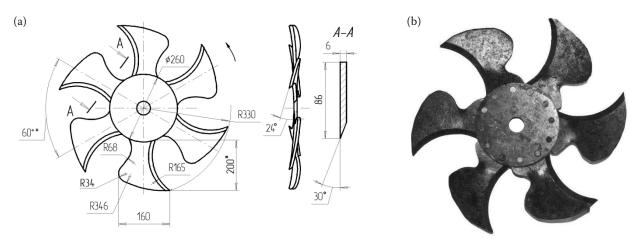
Disc-knife working body: (a) geometric parameters, (b) general view of the prototype
